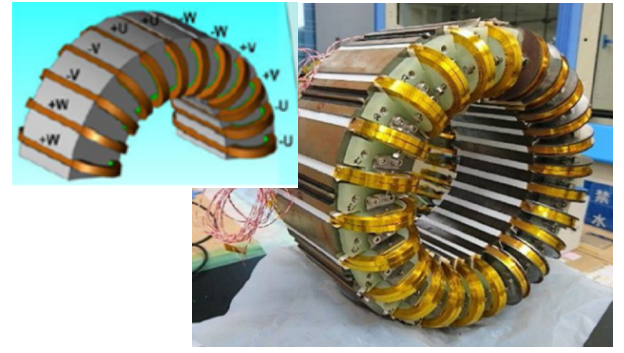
HTS stator with three-phase ring winding [28], [36].
